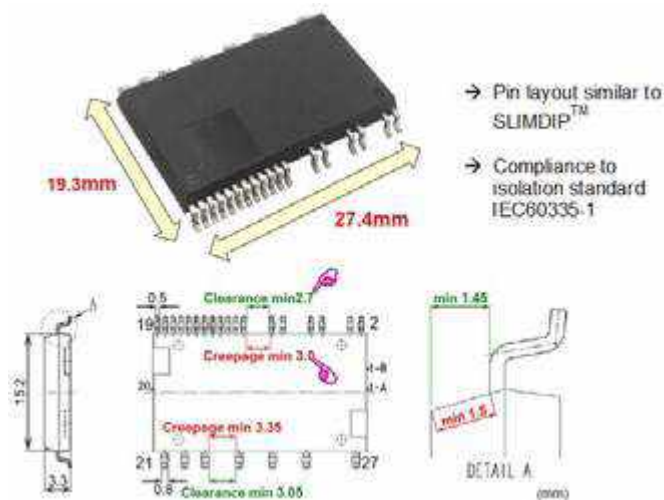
Package dimensions of the MISOP™ and the pin layout indicating the compliance to the IEC60335-1
